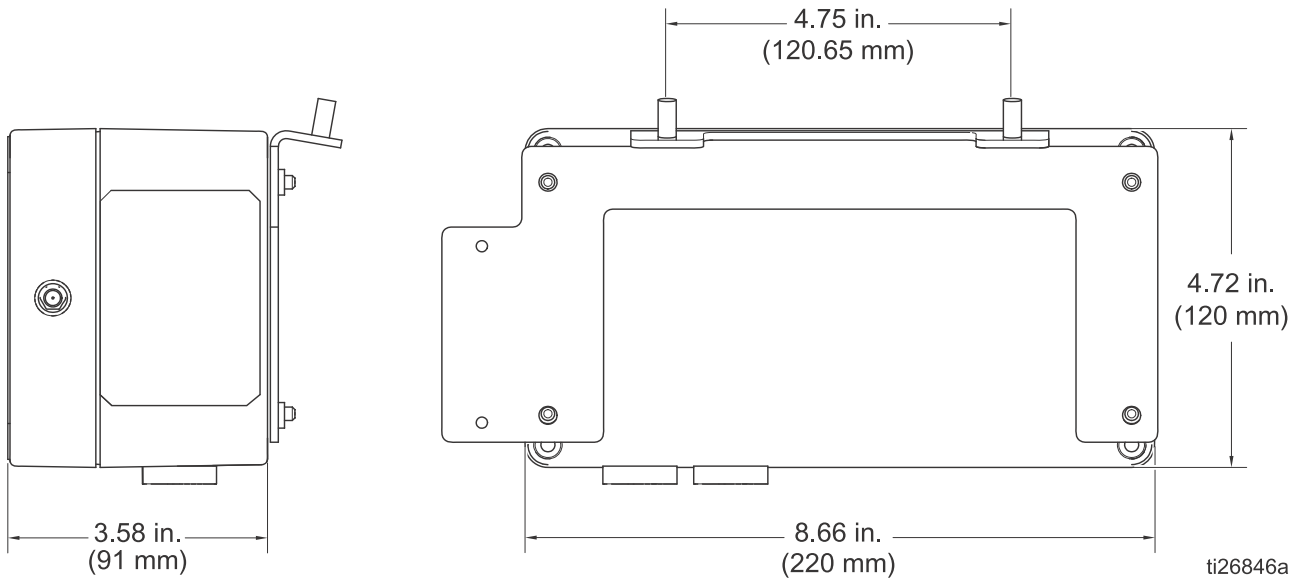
Harrier+ Dimensions and Mounting Hole Layout
